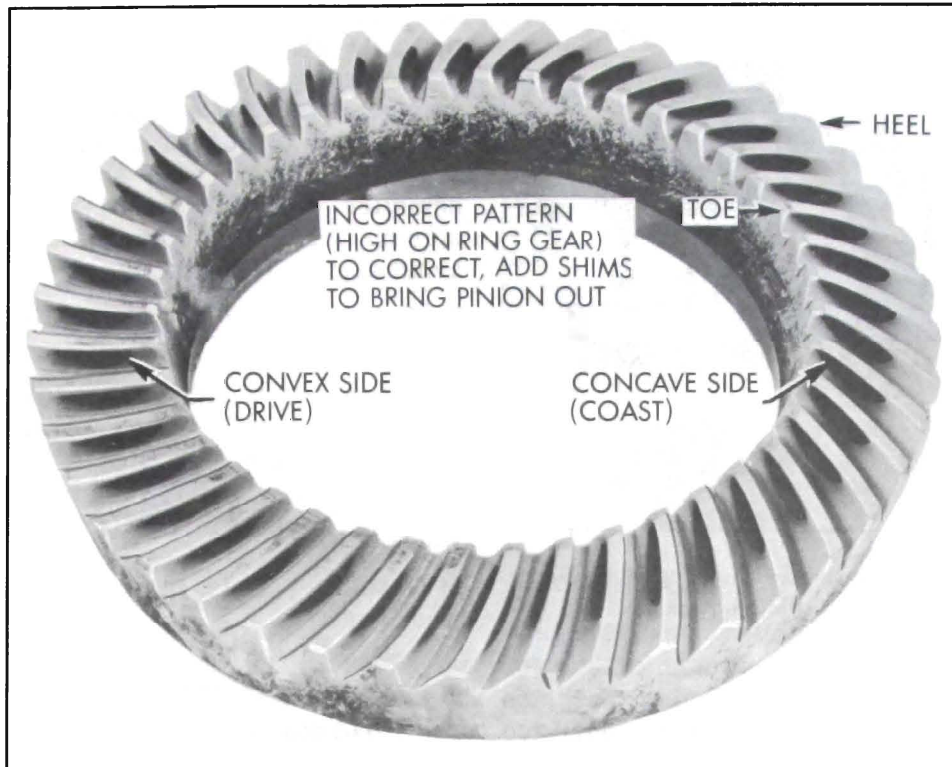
Ring Gear—Incorrect (high) Tooth Contact
